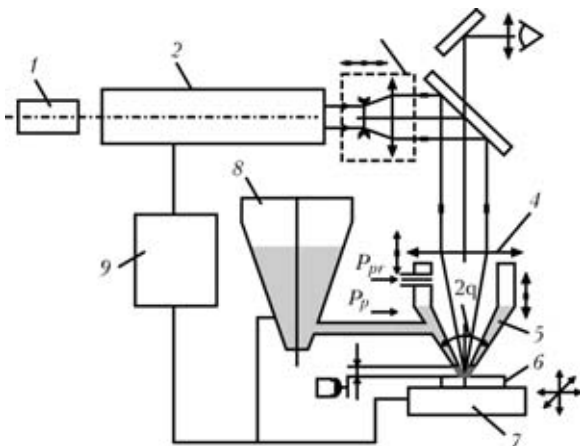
Industrial laser equipment: 1 – assist laser; 2 – working laser 200 W; 3 – telescope; 4 – focusing objective; 5 – coaxial nozzle; 6 – workpiece; 7 – worktable with 3 coordinates; 8 – powder feeder; 9 – control unit
